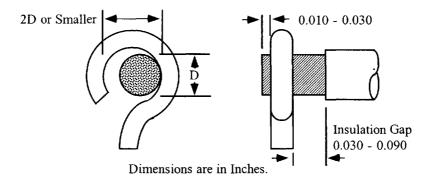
Not Wrapped, Hook Terminal Joint.
